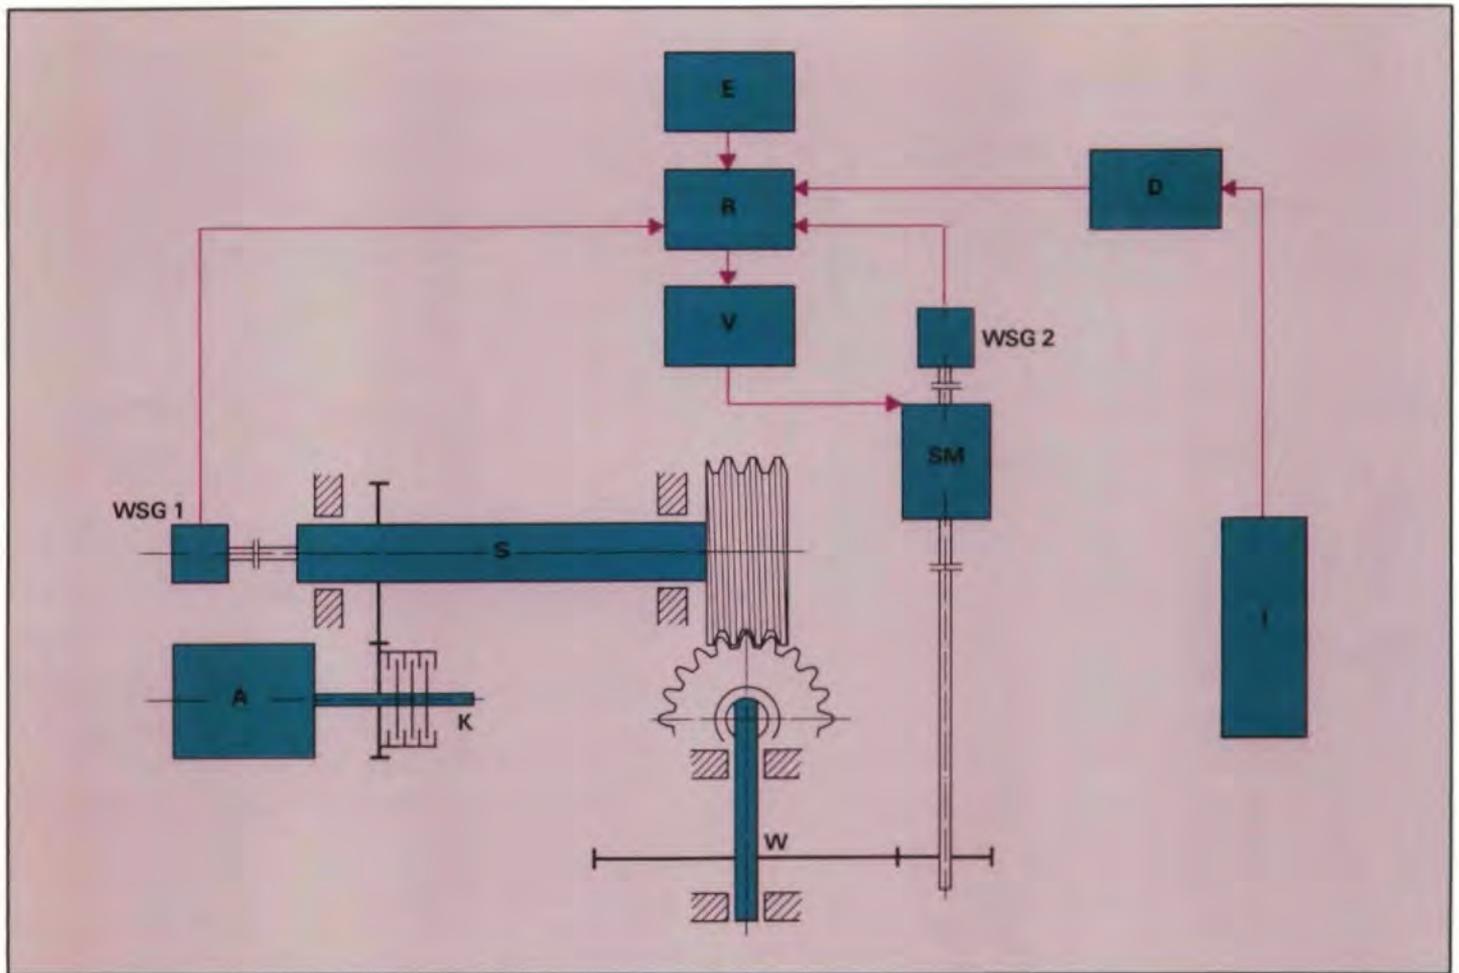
Threaded-wheel gear grinder electronic drive train.
